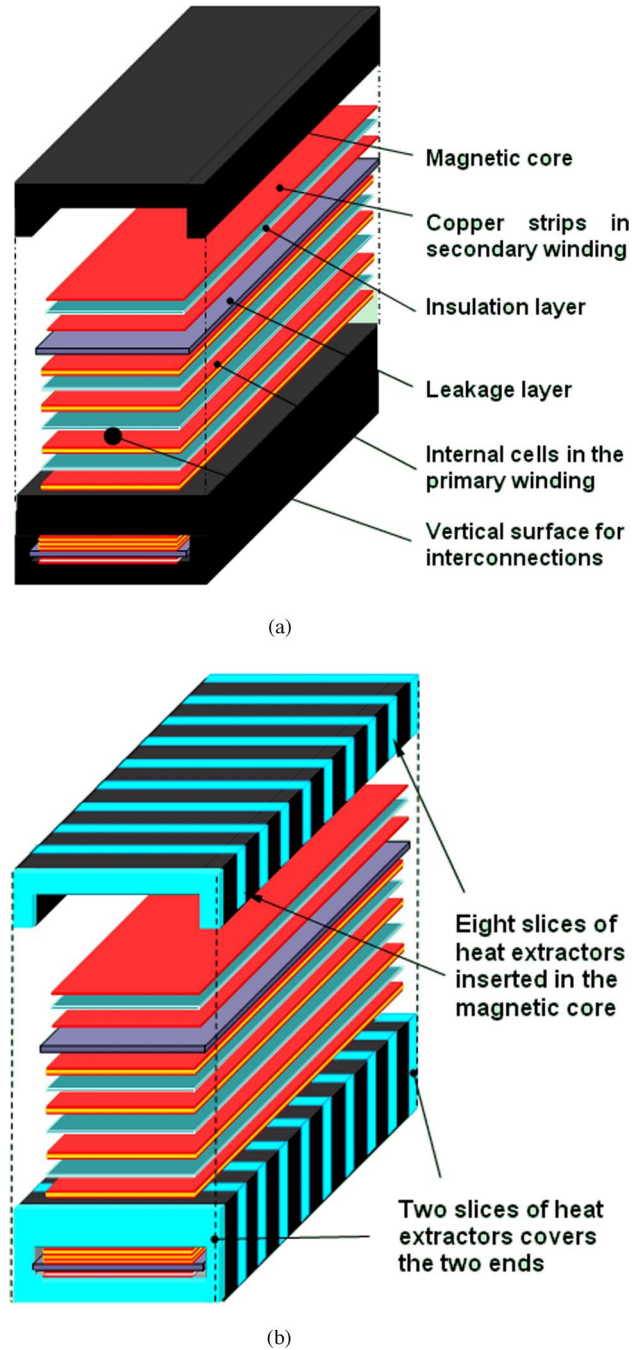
(a) Exploded view of the LLCT module without heat extractors. (b) Exploded view of the LLCT module with heat extractors.
